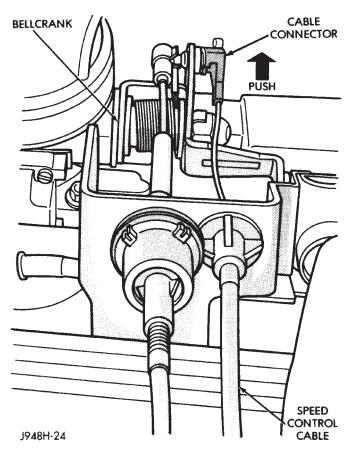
Servo Cable to Bellcrank—Remove/Install
